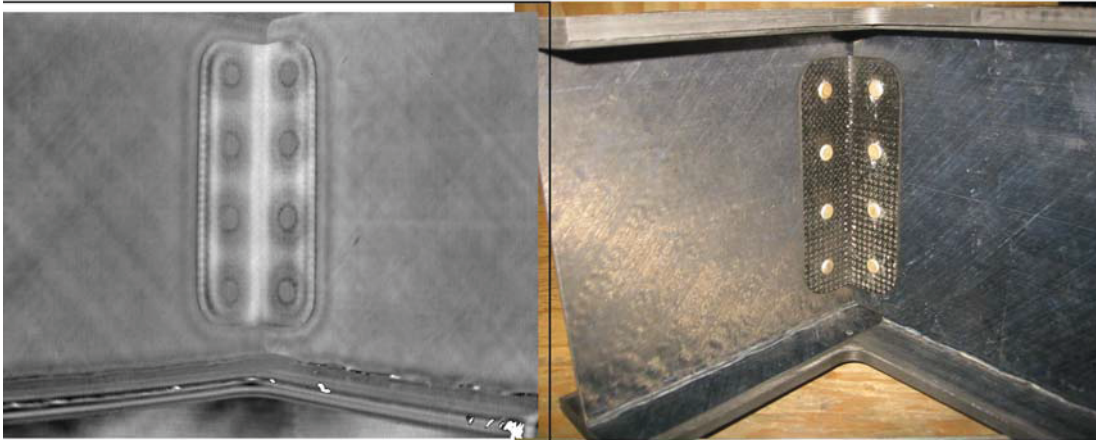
Thermal inspection results for cruciform 2, rivet 1.
